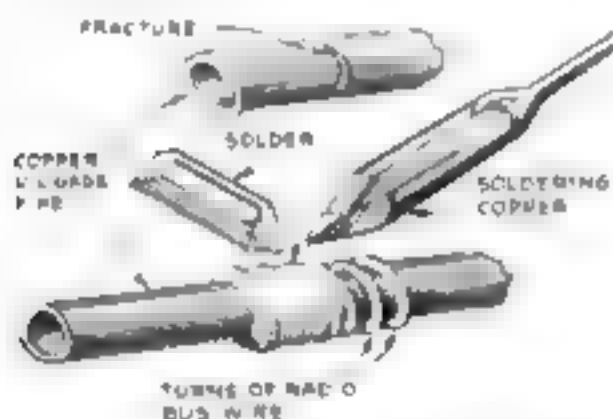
Leak in pipe can be repaired by winding wire around pipe and soldering.
